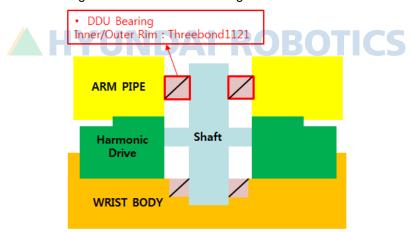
B-axis reduction gear Three Bond coating detail [HH007C]
